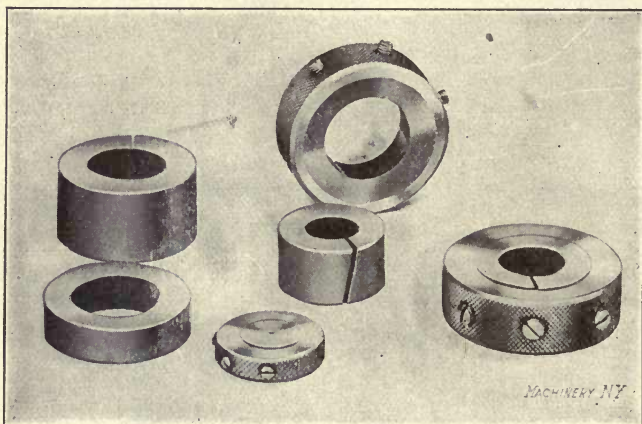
Lap and Lap-holders used for Making Plug Gages
